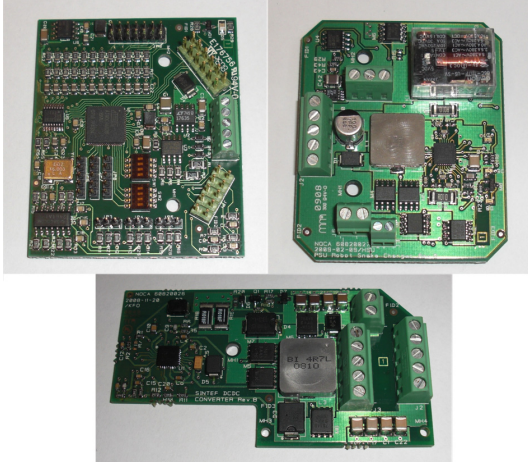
The three custom-designed circuit boards located in each joint module. Top left: Microcontroller card that controls the joint mechanism. Top right: Battery charger card. Bottom: Motor power supply card.
